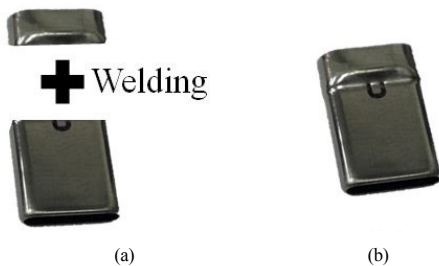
Comparison of manufacturing method of USB socket (a) two parts stamping and welding and (b) one part deep drawing
